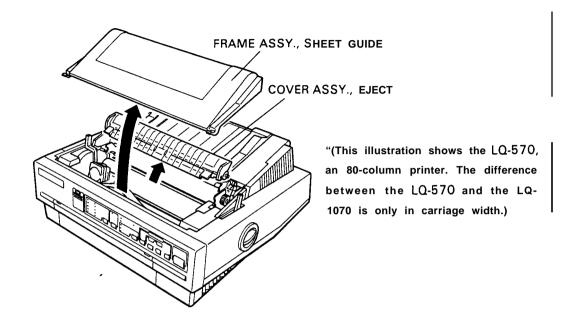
Removing the FRAME ASSY., SHEET GUIDE and the COVER ASSY., EJECT
